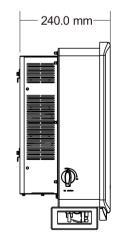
Dimensions of R6-15~25K-T2-32,R6-25K-T2-32-B
